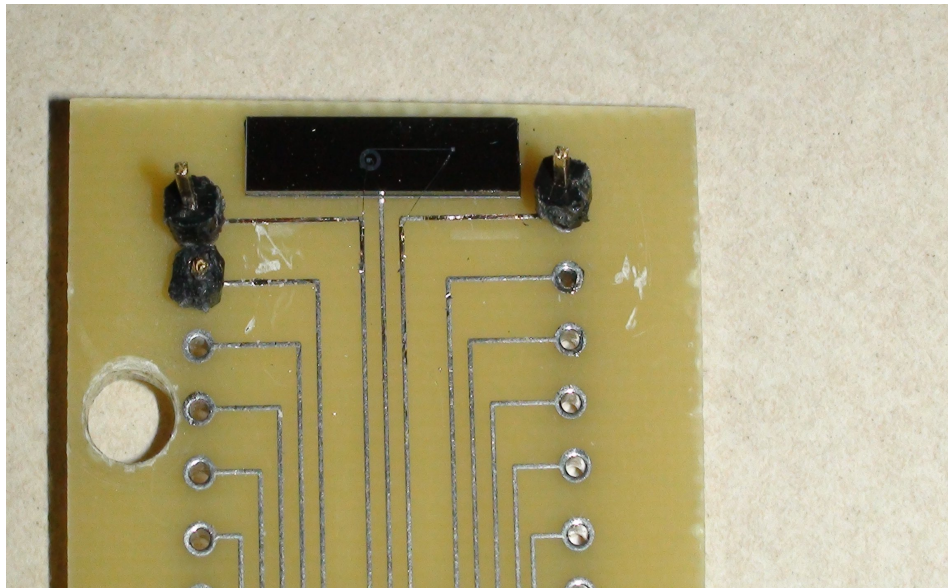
Picture of the 1 mm fabricated coil using Aluminium
